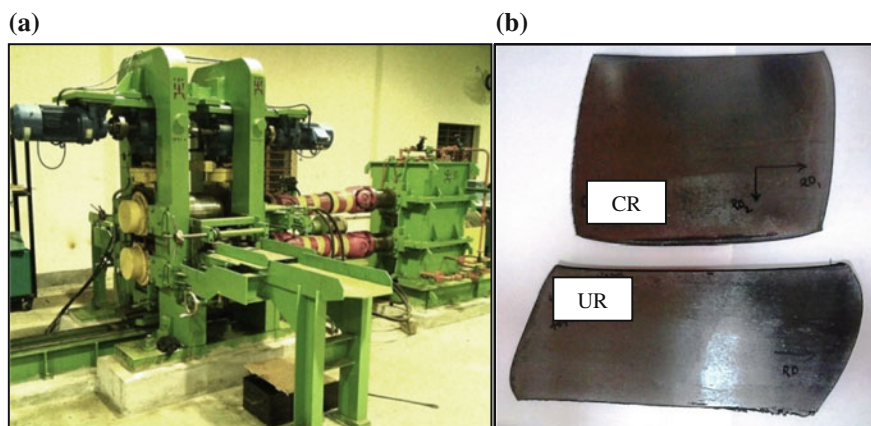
a 2-HI Rolling mill and b Rolled samples
